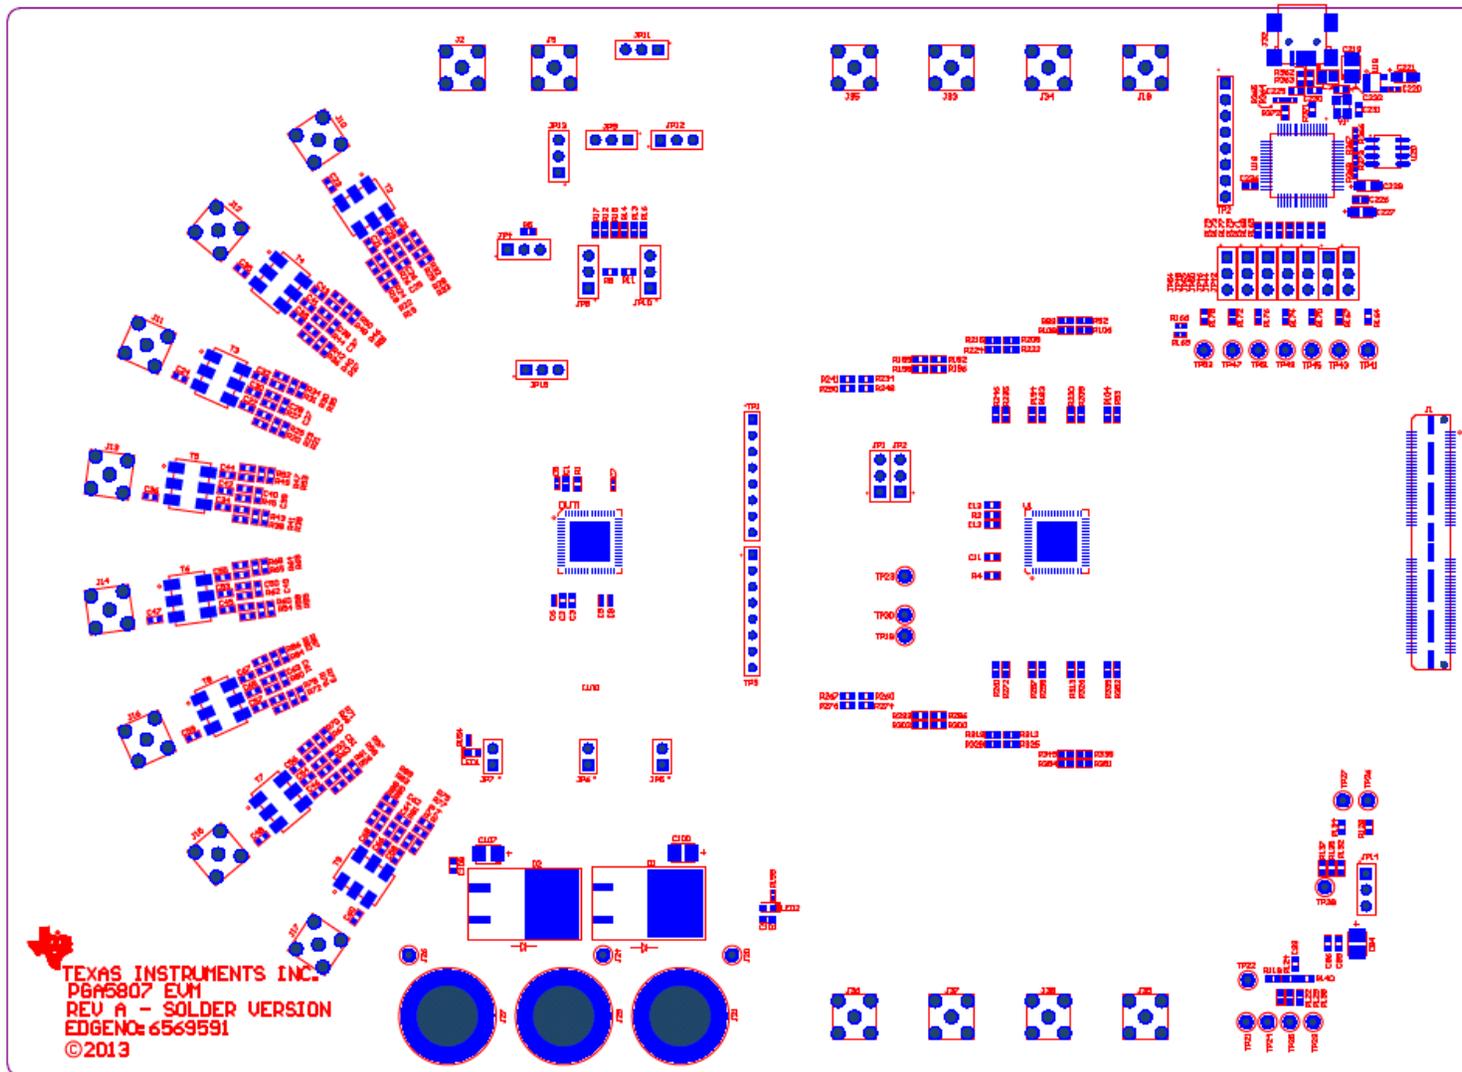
PGA5807 EVM Top Layer Assembly Drawing – Top View
